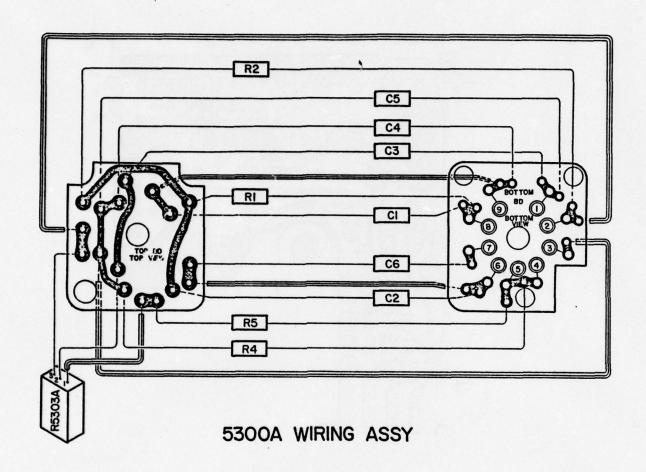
P.C. BOARD LAYOUT FOR THE A5300A SQUELCH FILTER ASSEMBLY
